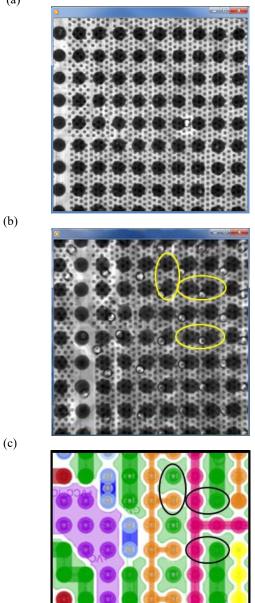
a) and b) Top-view X-ray image collected at \sim 240°C for the SMD pads on a single CU plane and SMD design connected with traces, respectively; (c) corresponding PCB top-layer design showing directional solder flow across the traces
